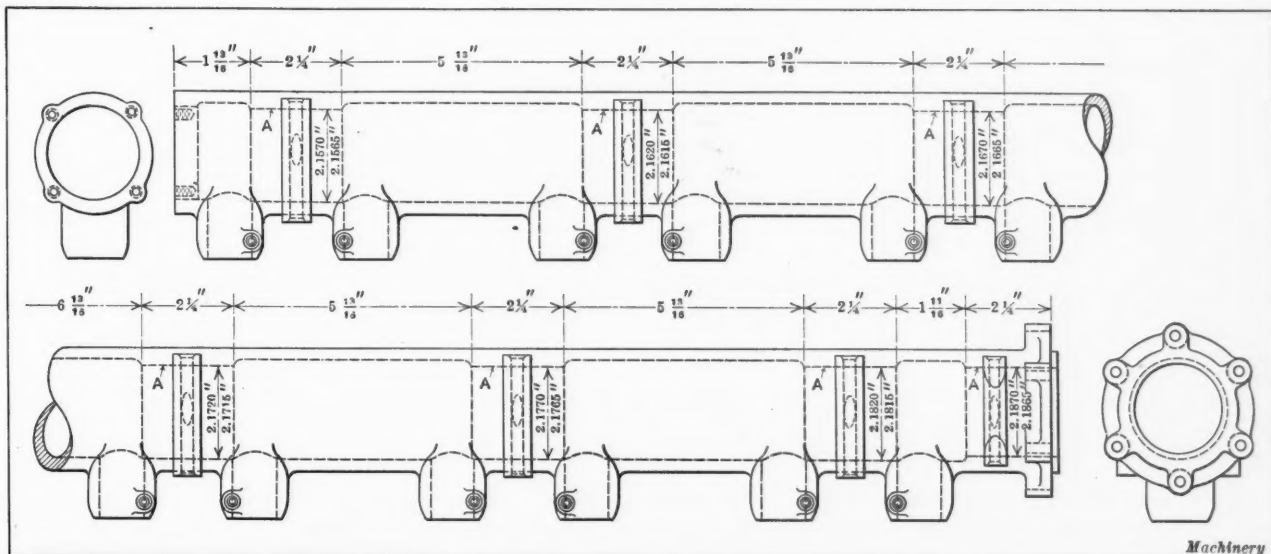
Cam Frame of a Murray & Tregurtha Engine in which Seven Bearings A are finished by broaching
